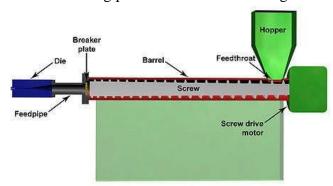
Diagram of a 3D Printer Filler Extrusion Tool
